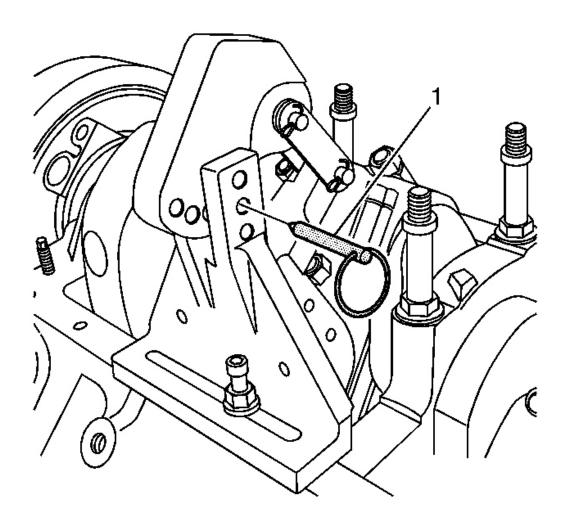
Positioning Pivot Arm To Base & Inserting Pin Courtesy of GENERAL MOTORS CORP.
